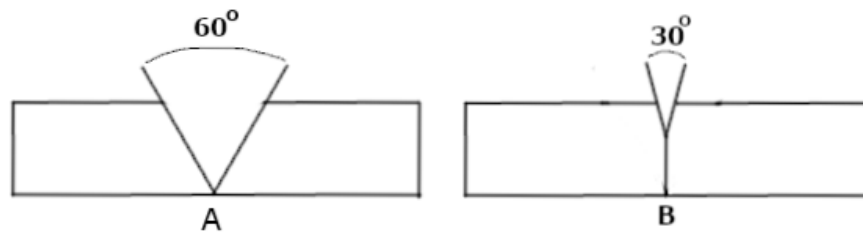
Illustration of a common joint welded by SAW (A) and laser-hybrid process (B).
